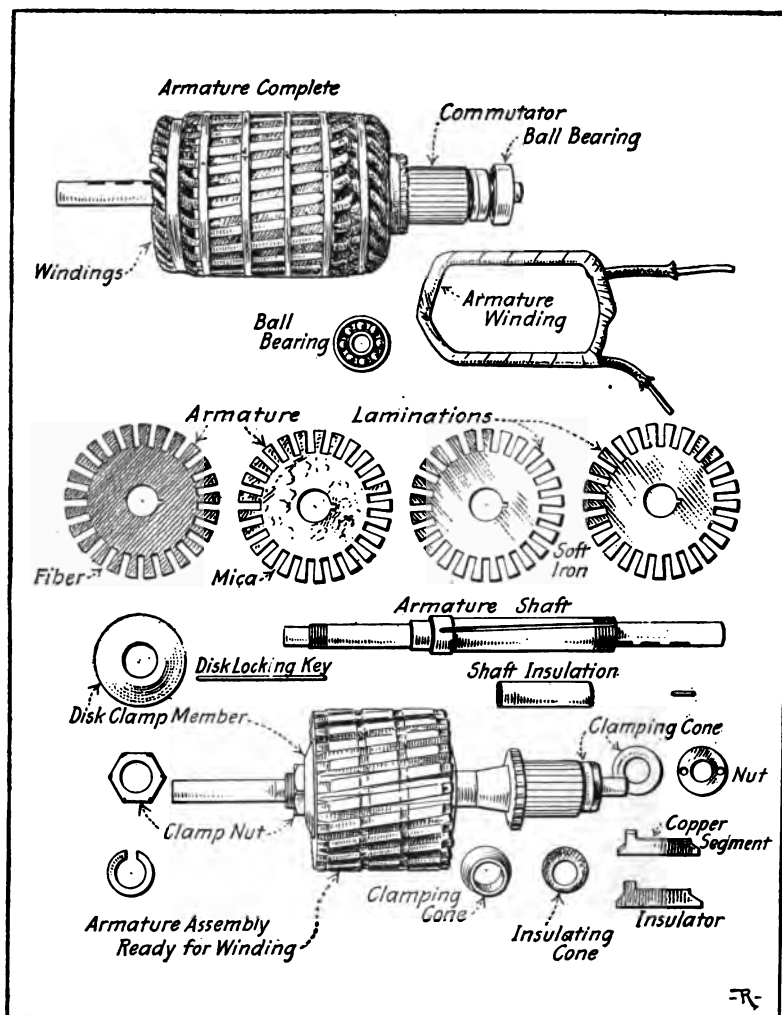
Components of North East Motor-Generator Armature Assembly.
